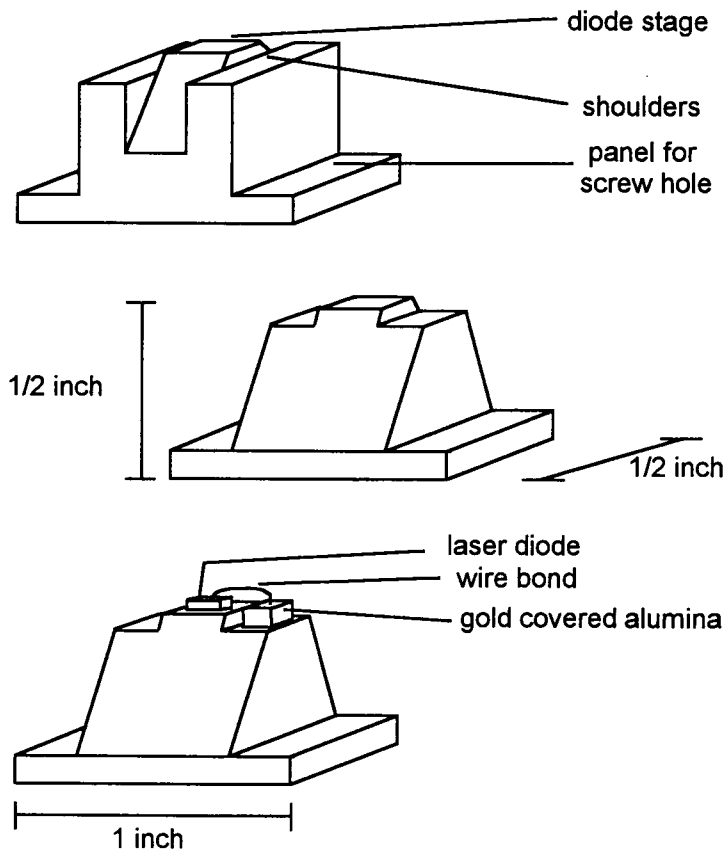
Design of diode headers/heat sinks for remounting a (top): initial design, b (middle): improved design, c (bottom): header with diode mounted.
